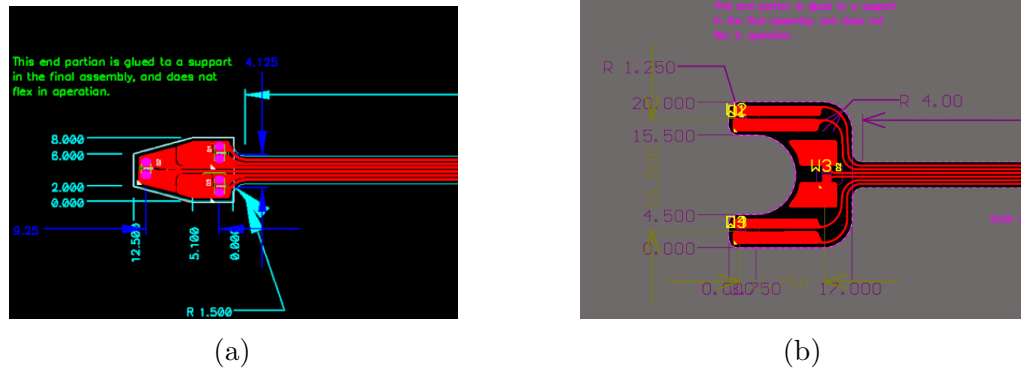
ASAP’s triangle-shaped flexible PCB (a) and fork-shaped flexible PCB (b).
